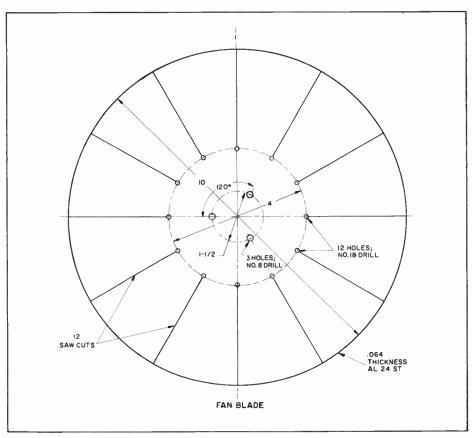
Fan Blade Required for Cooling When Motor Is Remounted
